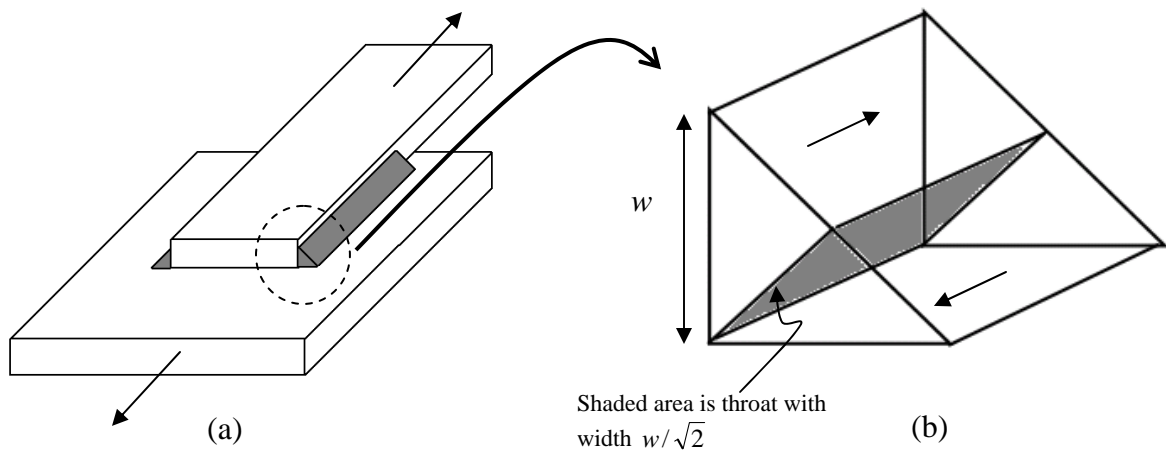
Fillet welded lap joint (a) overview and (b) cross section
